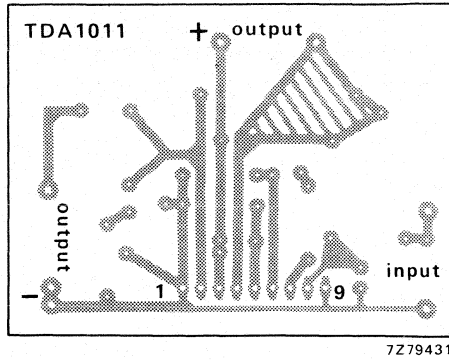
Track side of printed-circuit board used for the circuit of Fig. 4; p.c. board dimensions 62 mm x 48 mm.
